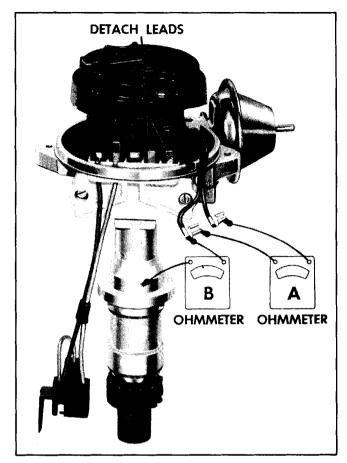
E-64 Unit Distributor - Pickup Coil Check
